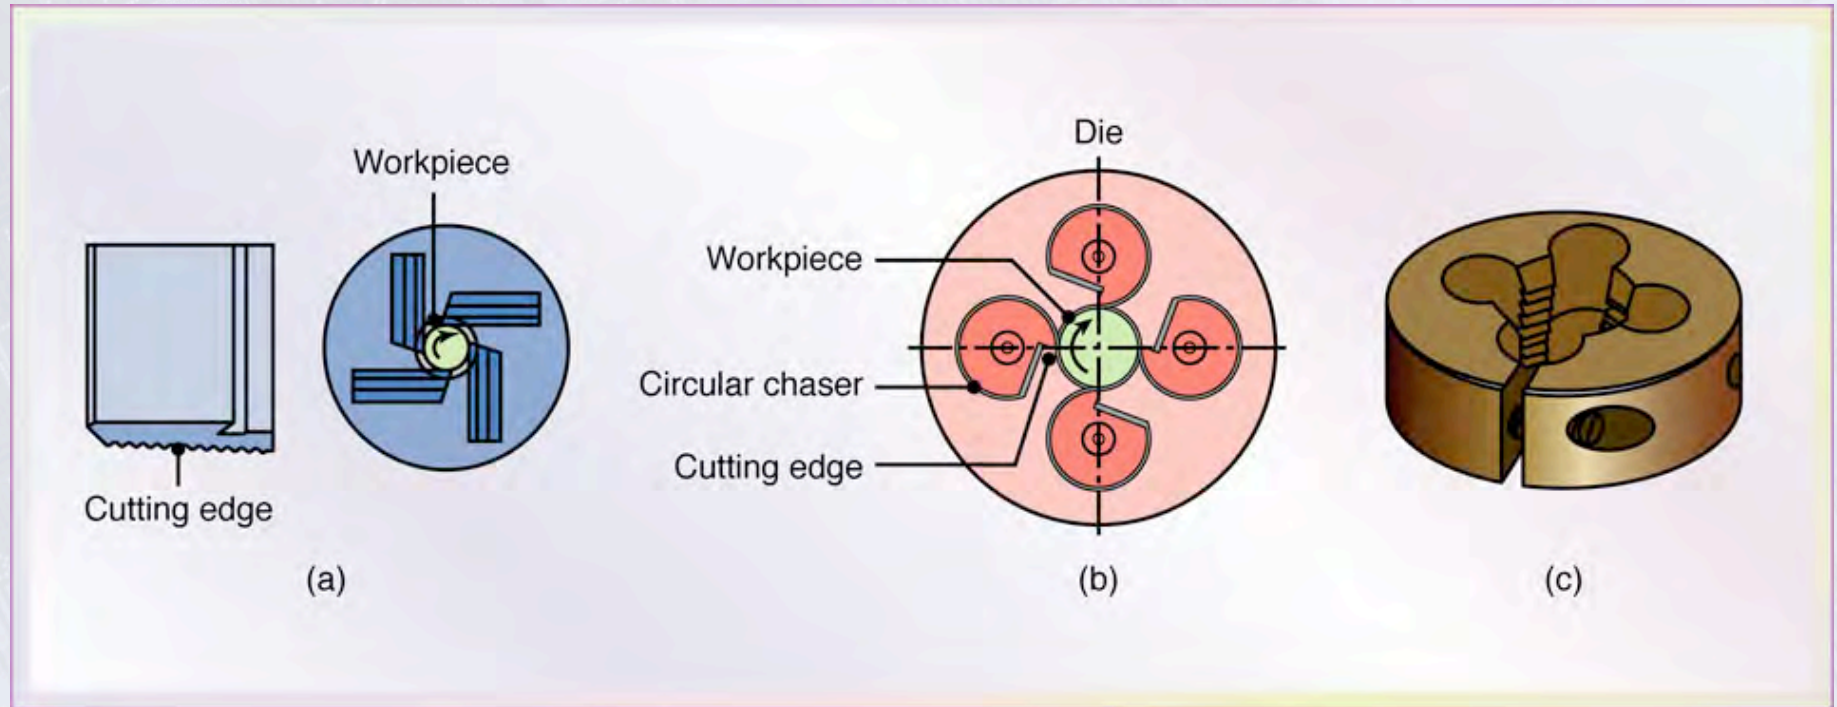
(a) Straight chasers for cutting threads on a lathe. (b) Circular chasers. (c) A solid threading die.
